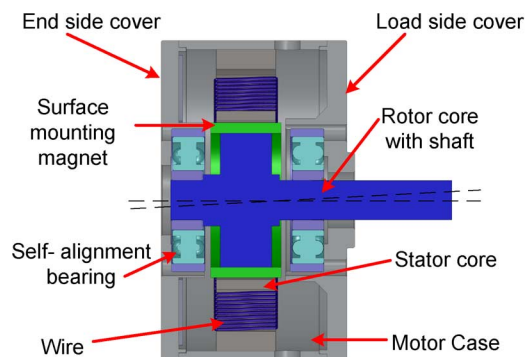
Inner rotor PM-BLDC motor with self-alignment bearing.
